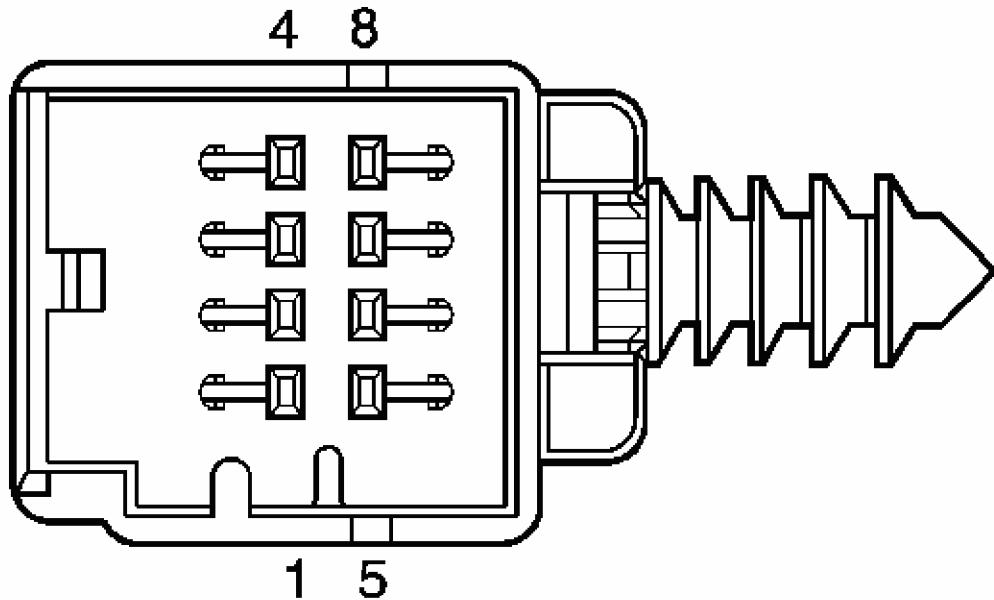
Outside Rearview Mirror - Passenger C2 (A45) Connector End View
